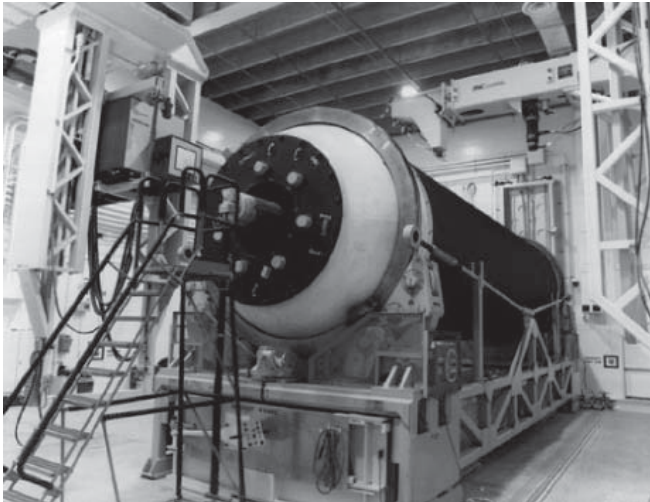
Solid Rocket Motor Mounted on the HR3DCT Rotary Stand for Bondline Inspection.
